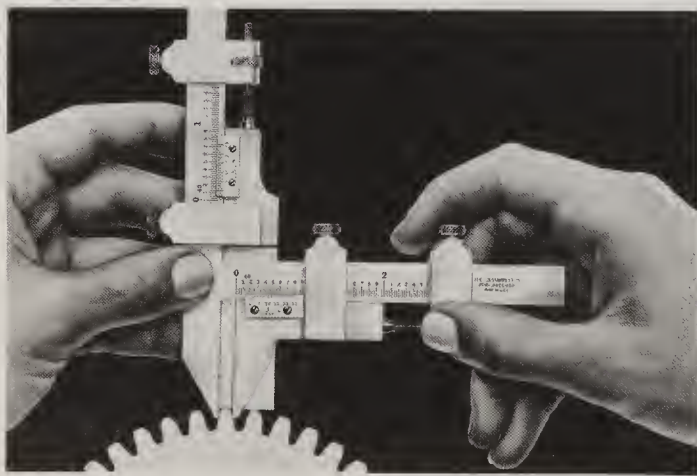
Measuring tooth thickness with a gear Vernier Caliper. (L. S. Starrett Co.)
